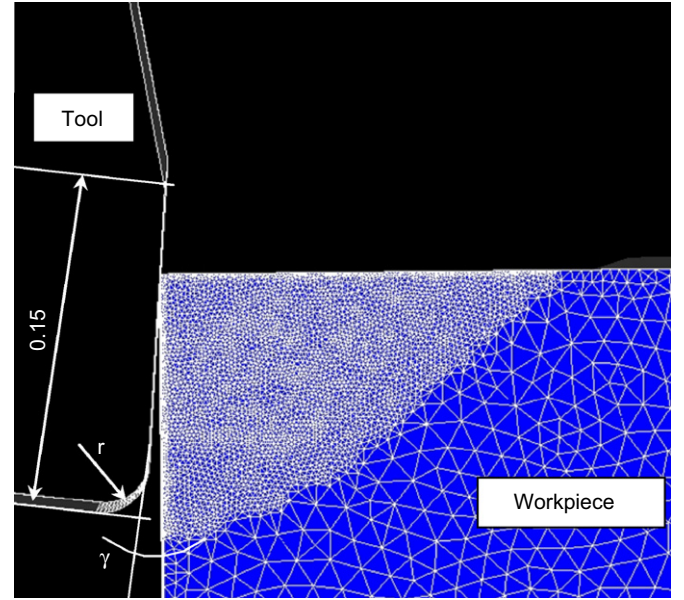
Initial tool geometry and workpiece undeformed mesh.
